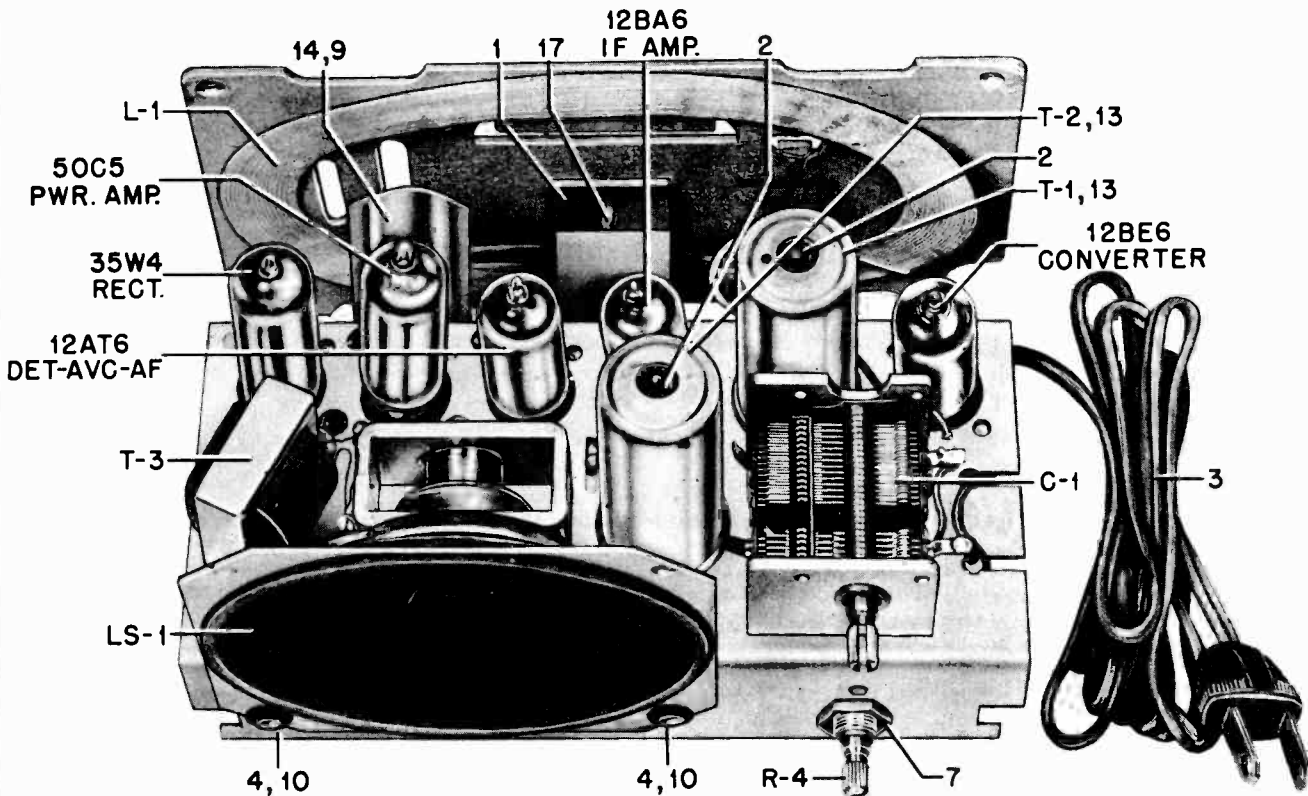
PARTS LOCATION - CHASSIS TOP VIEW
